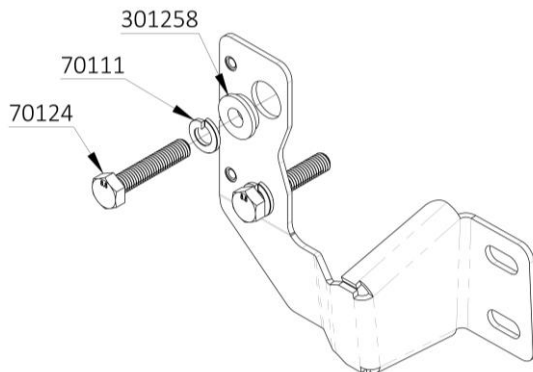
Lower Bracket, Lower Bolt Hardware
